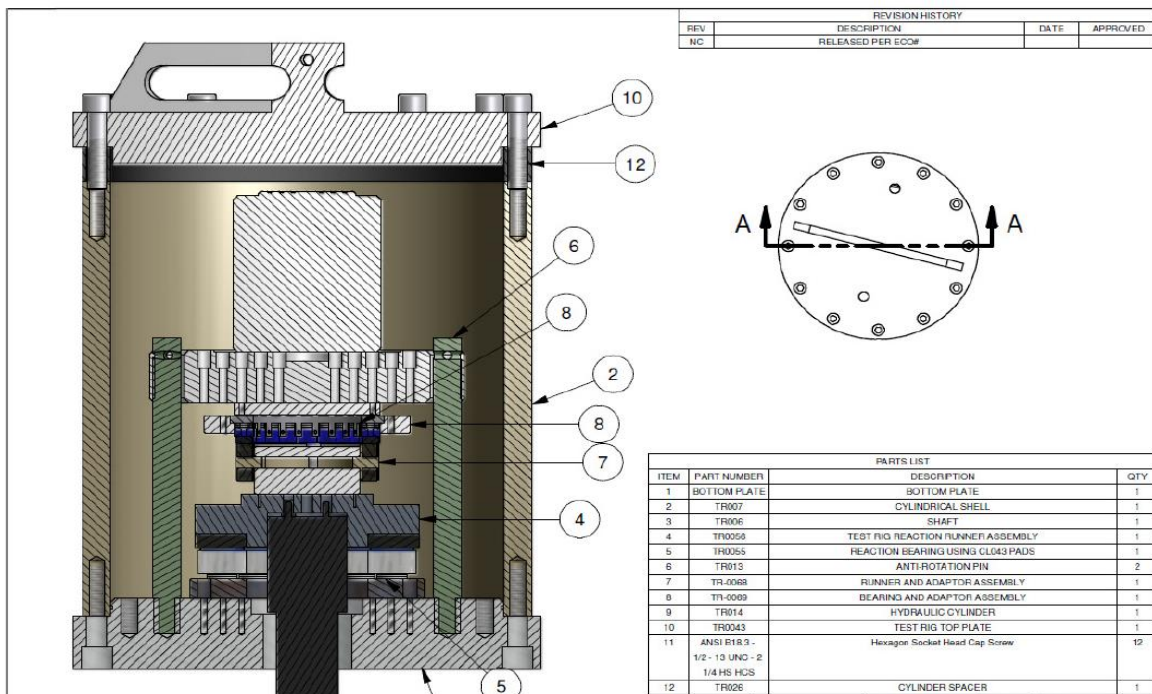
Russell's thrust bearing test rig cross section with labeled components [20]
